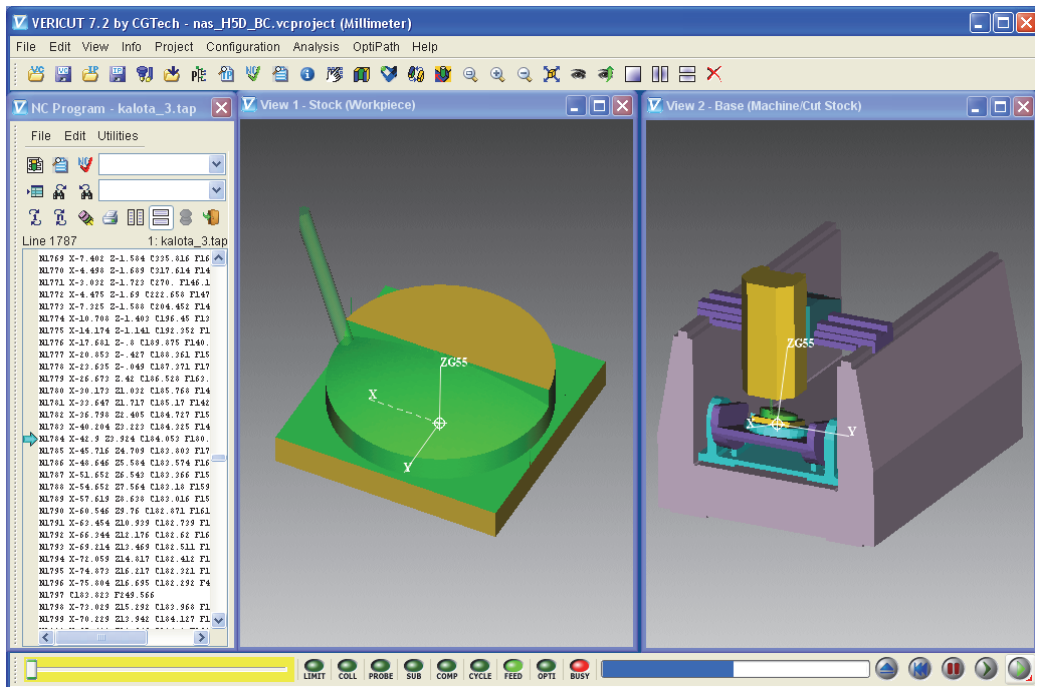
Material removal simulation with machine simulation for 5-axis machining
